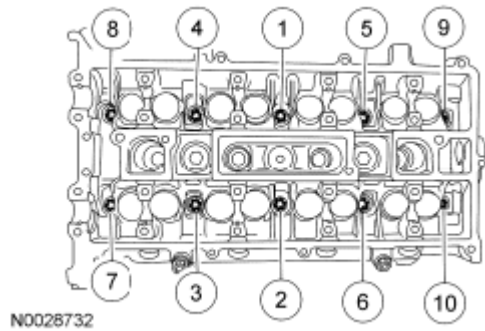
Identifying Cylinder Head Bolt Tightening Sequence
